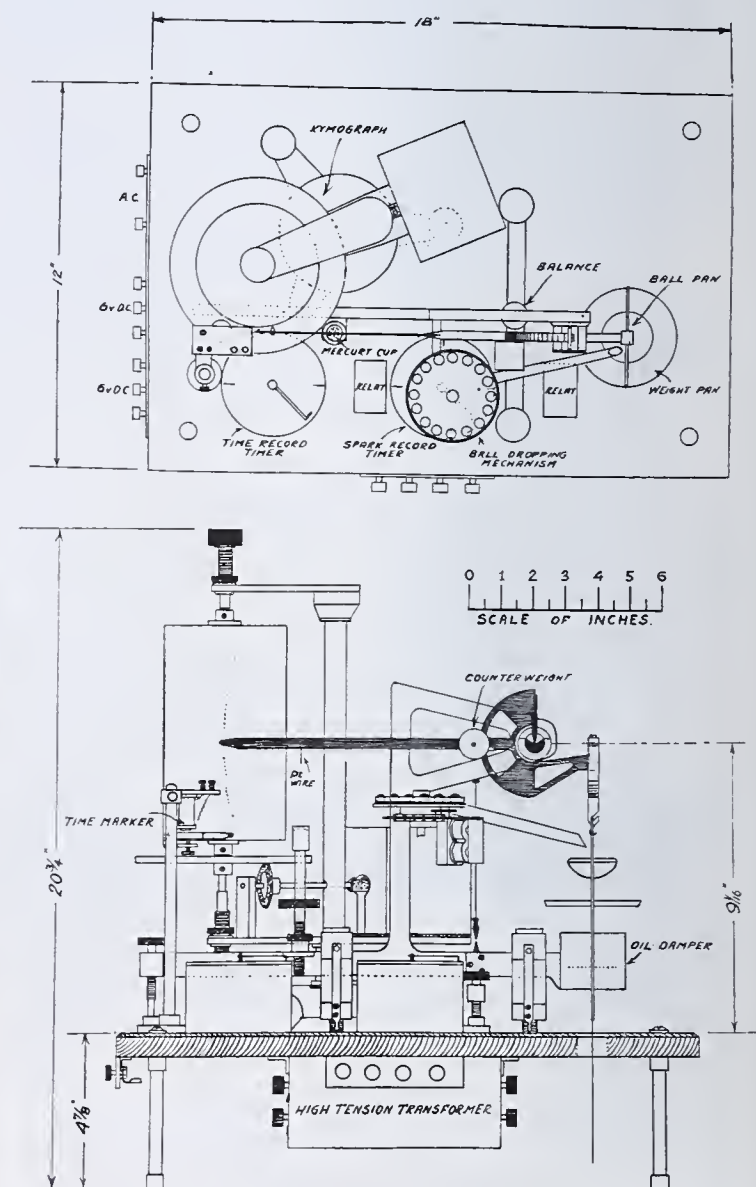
DETAILS OF COMPLETE ASSEMBLY
